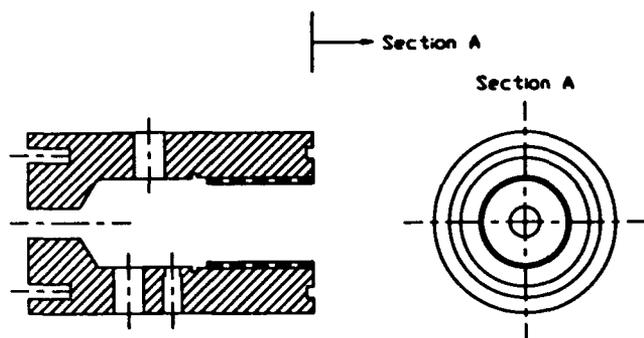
Scaled drawing of the Zuech injector mount and chamber volume (outermost diameter is 76.2 mm).
